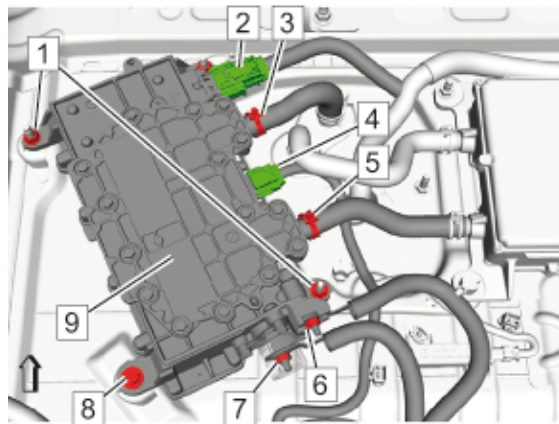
Accessory DC Power Control Module, Bolt, Nuts, Coolant Hoses, Clamps And Electrical Connectors
